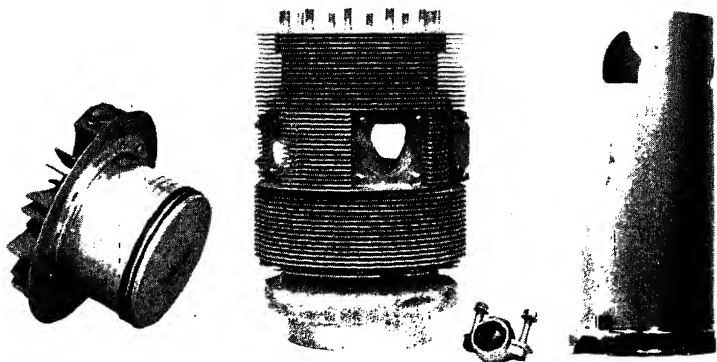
SHOWING SLEEVE, BARREL AND JUNKHEAD.
